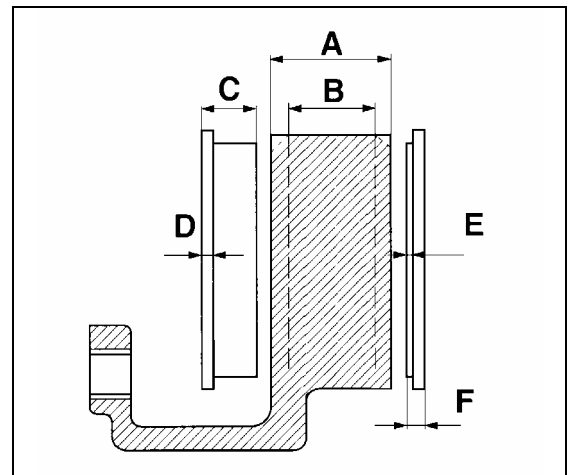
ROTOR AND PAD WEAR LIMITS
